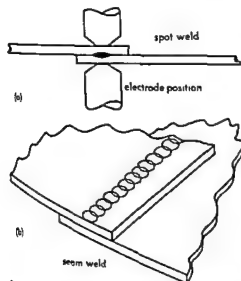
Common electrical resistance welds. (a) Spot weld. (b) Seam weld.
